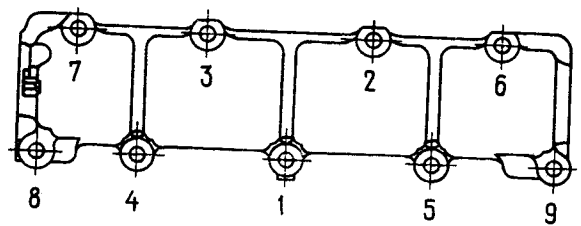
Sequence of Tightening Camshaft Bearing Housing Nuts
